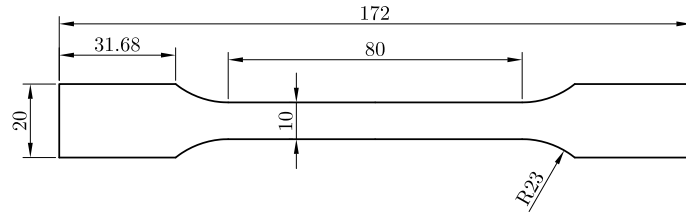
Dimensions of the GFRP plane tensile specimens, in millimeters.
